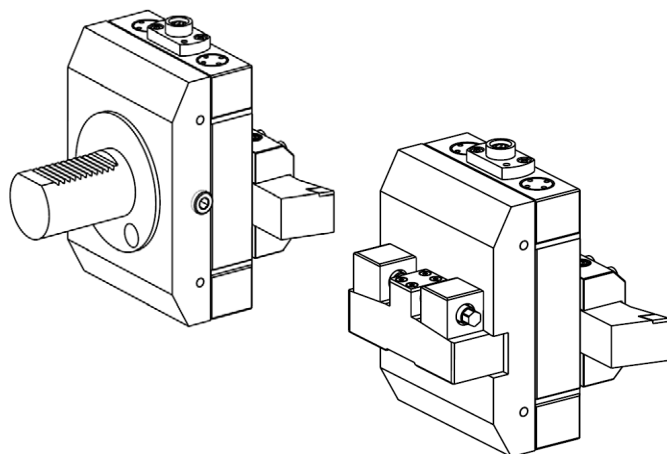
Dynamometer Type 9129AA with machine adapter Type 9129AB40 (left) and Type 9129AD25 (right) and tool holder Type 9129AE25
